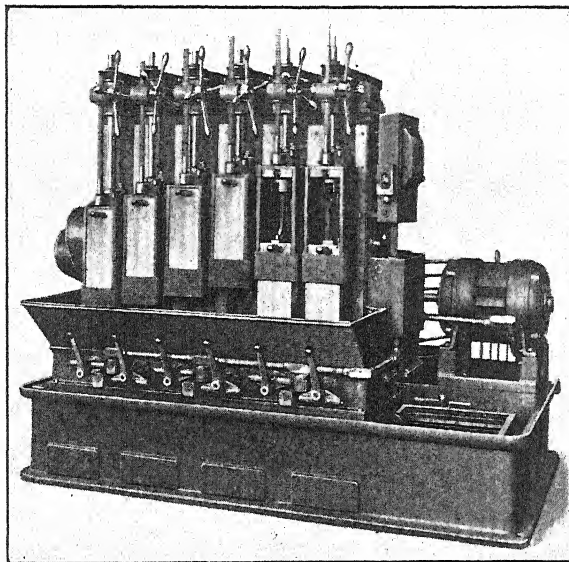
The Pratt and Whitney Vertical Six-Spindle Deep-Hole Drilling Machine Setup for Drilling Oilholes from the Crankpin to the Wrist-Pin Bearing of a Forged-Steel Connecting Rod.
